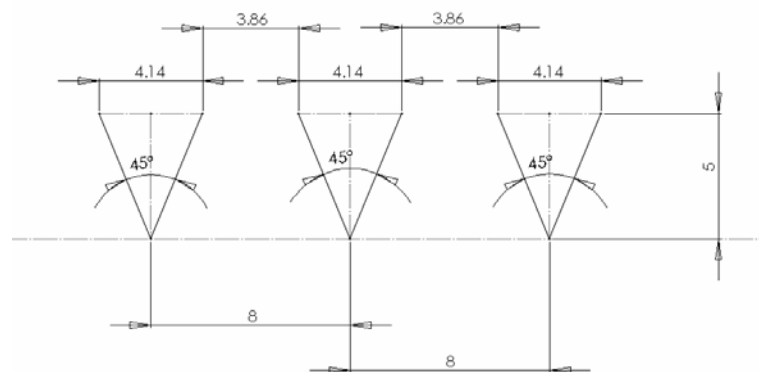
(a): Schematic drawing of the 45° grooves (all dimensions in μm)
